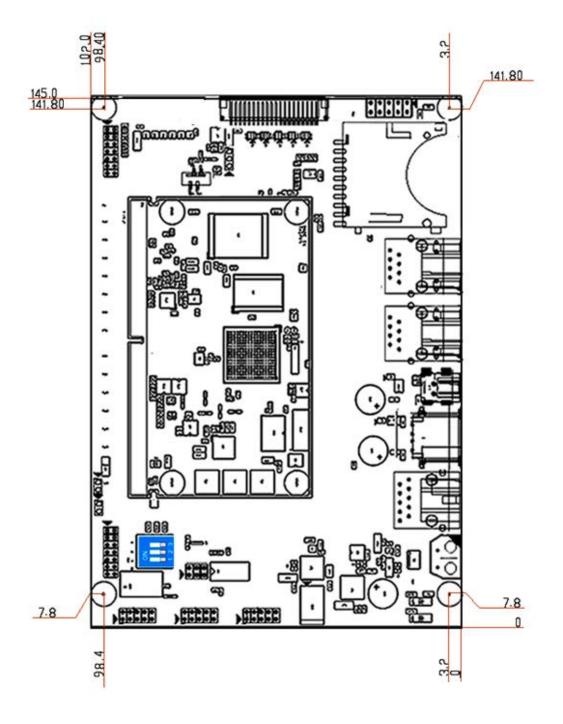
SBC-SMART-BEE Mounting Holes Mechanical Drawing Information
